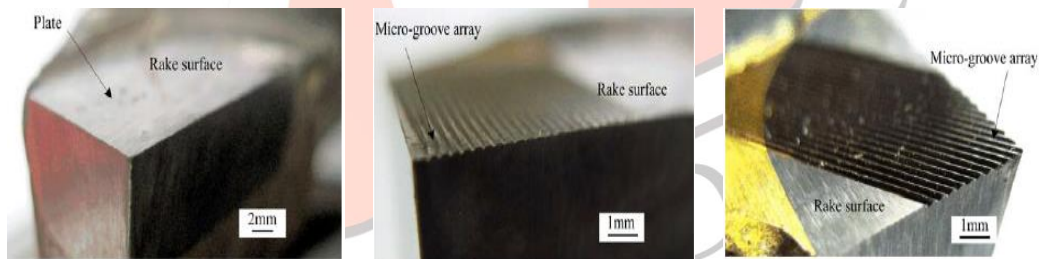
Three tools with different rake surface features a) Traditional plate tool b) Orthogonal micro grooved tool and c) Diagonal micro-grooved tool [16].
